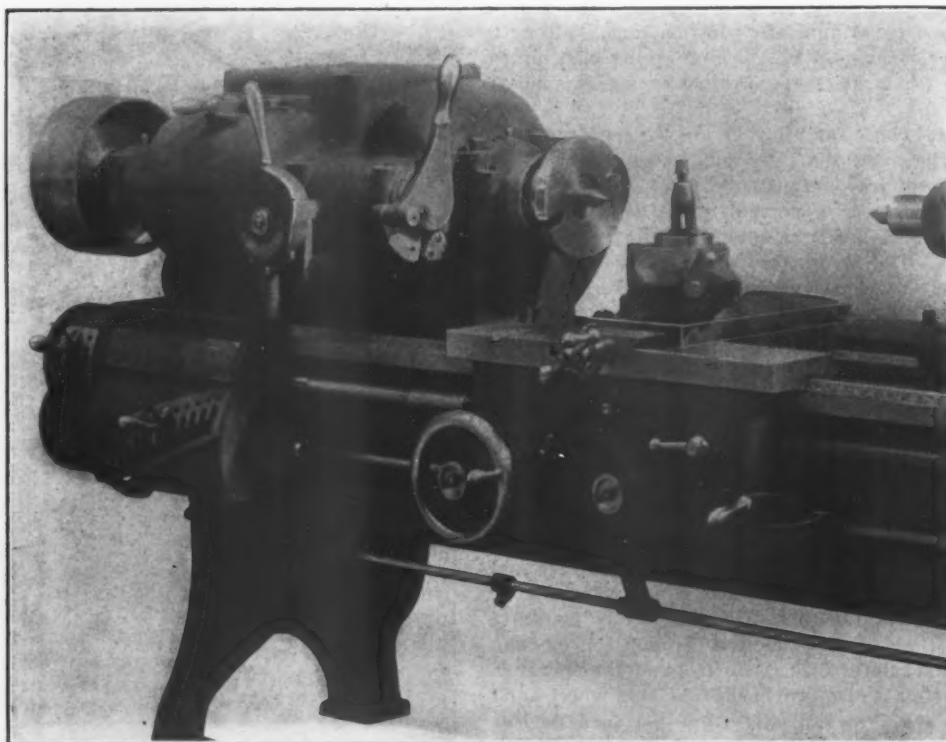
A 20-In. Lathe with the New All-Geared Head, Built by the Hendey Machine Company, Torrington, Conn.
